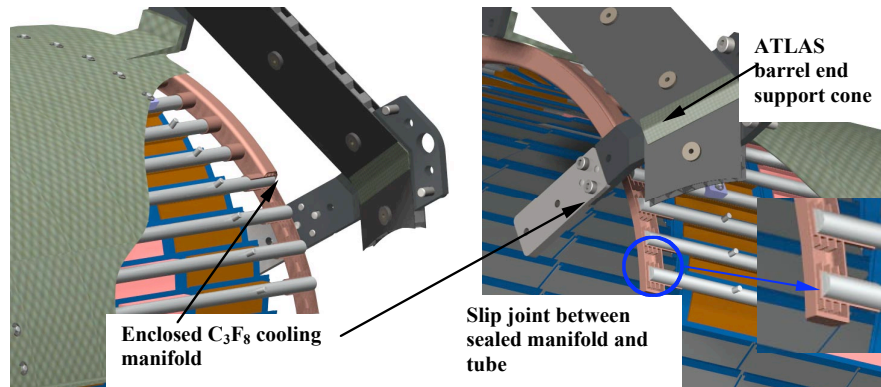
Concept of evaporative coolant manifold to remove heat from the heat-pipe tube ends.
